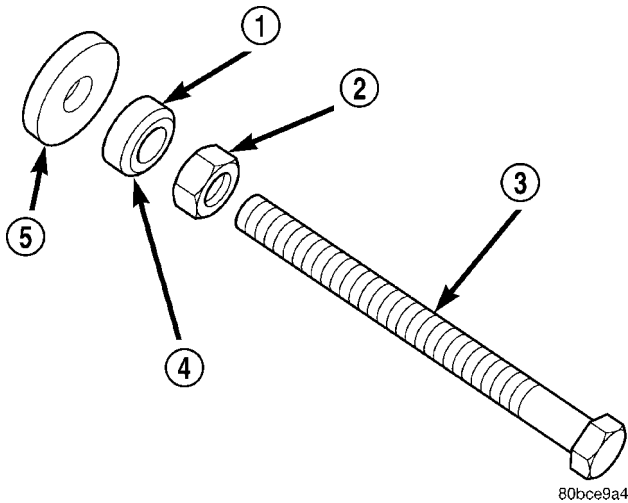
Proper Assembly Method for Special Tool 8512-A
